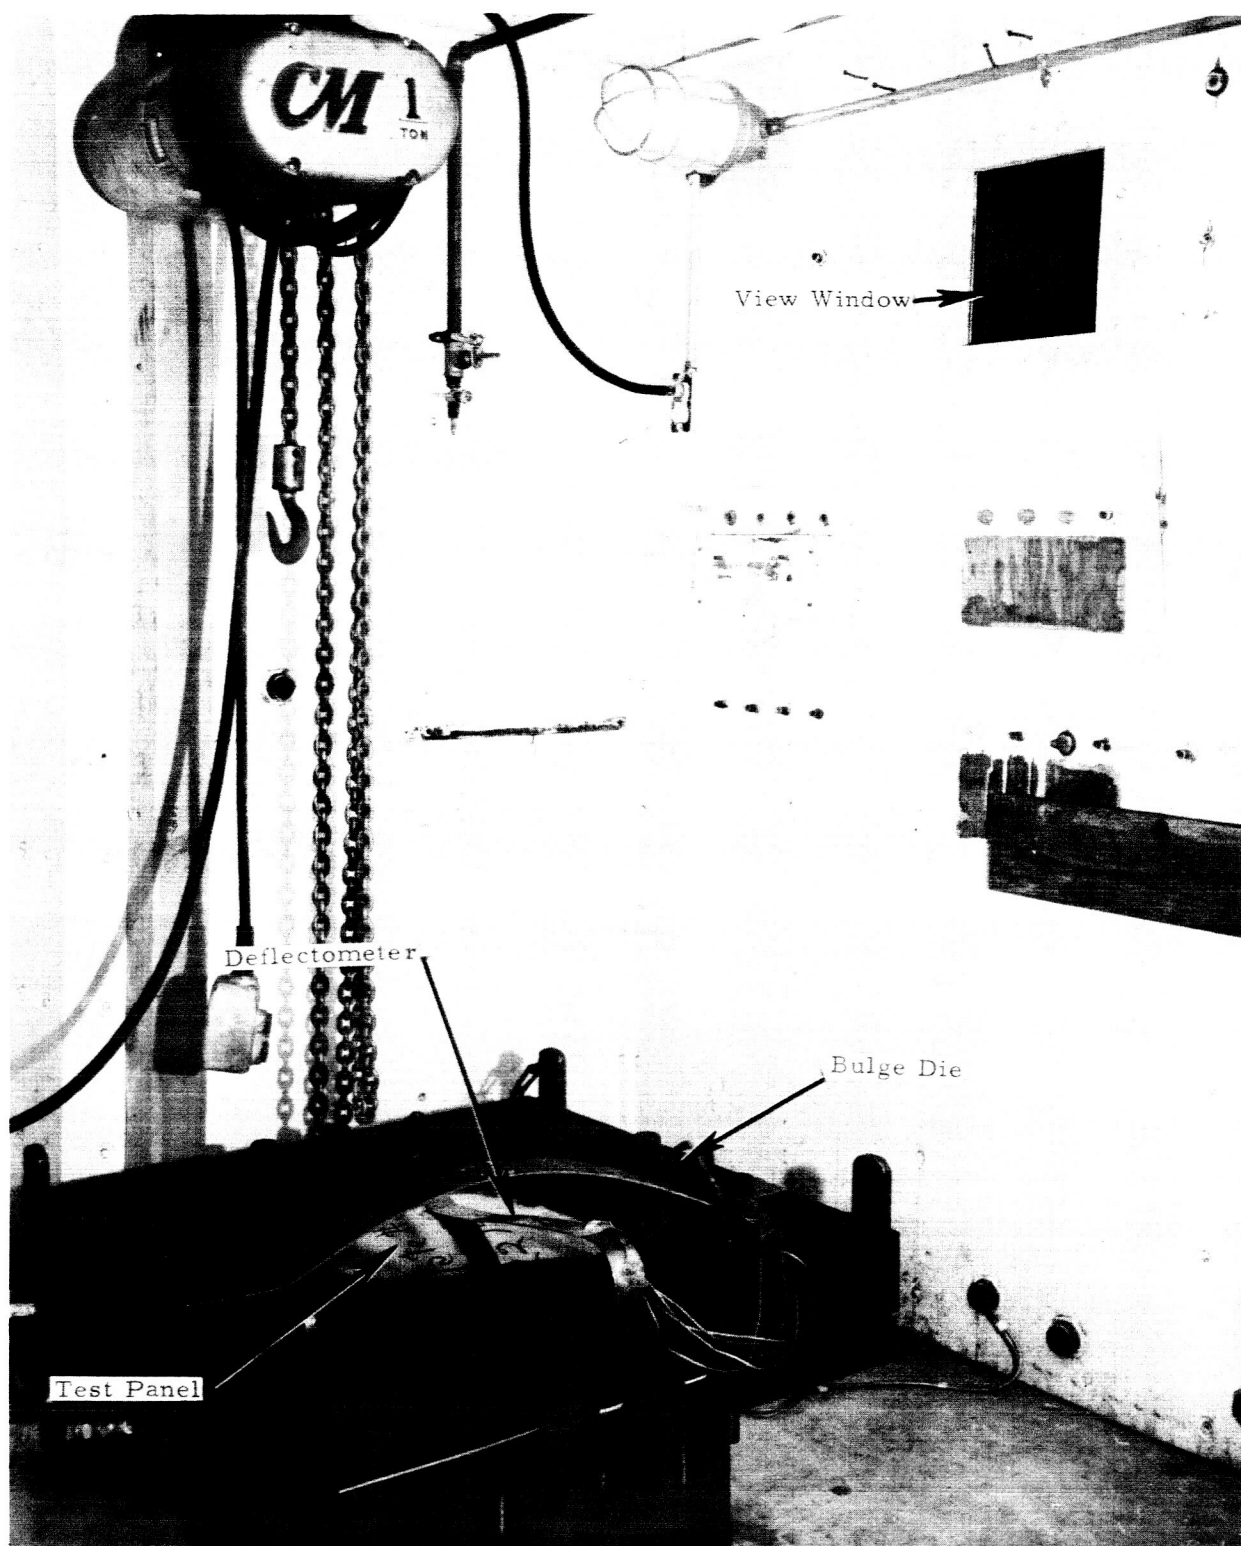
CIRCULAR BULGE DIE AND TEST PANEL ASSEMBLY IN TEST CELL
